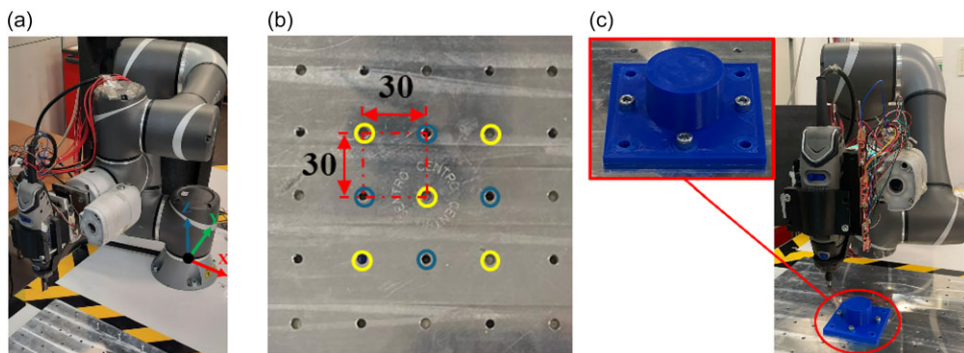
The robotic station: (a) overall view; (b) detail of the aluminum ground plate with reamed (yellow) and threaded (blue) holes; (c) detail of an assembled workpiece to be machined.
